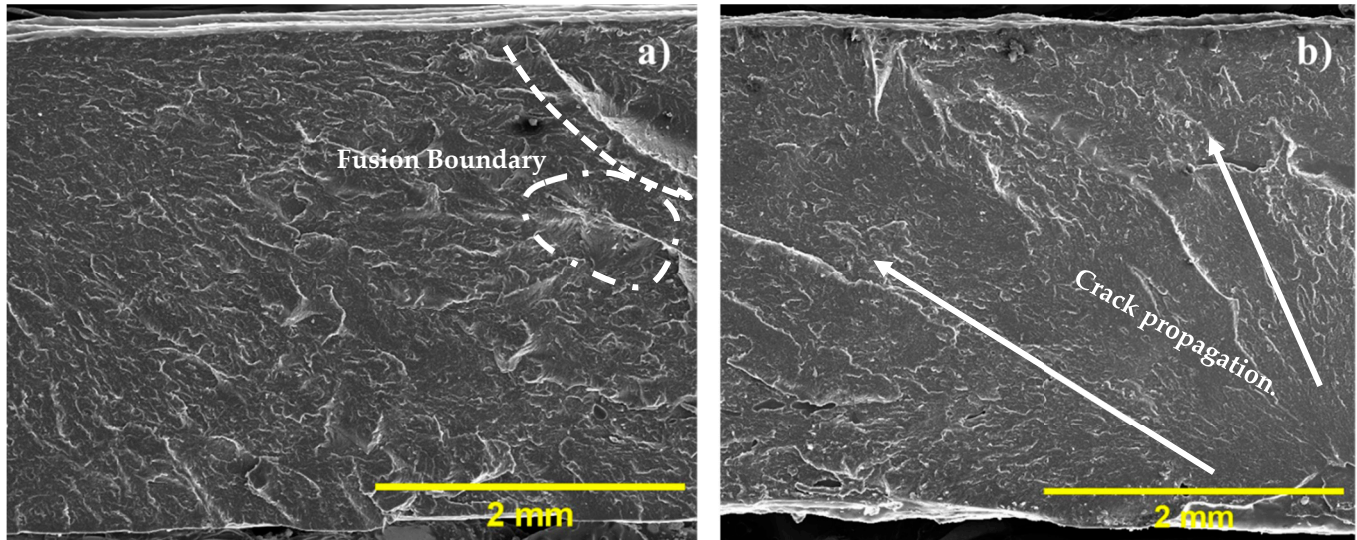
Tensile fracture morphology of HTN Z (a) 2B and (b) 4B designs.
